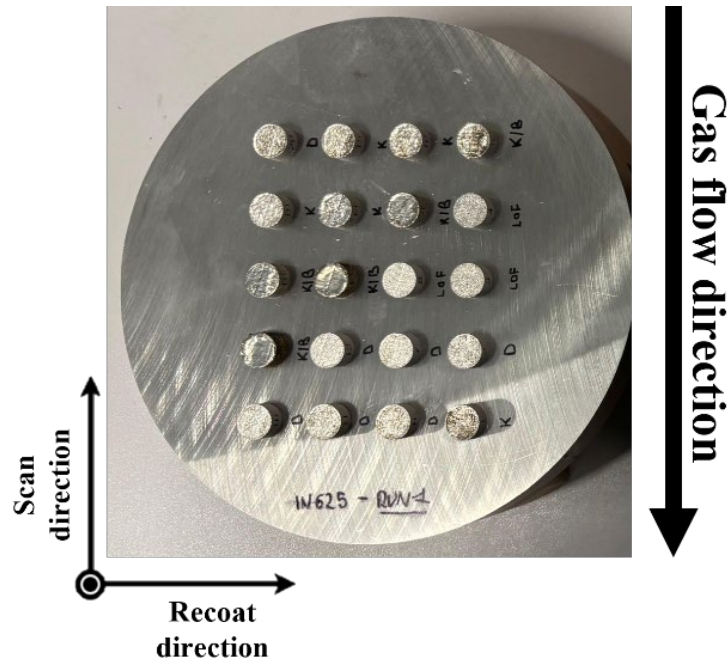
Layout of the as-built IN625 cylindrical specimens on the build platform.
